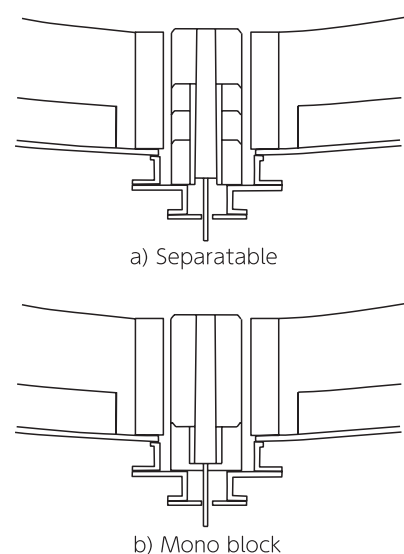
Two types of bottom blowing tuyere assemblies installed at the bottom of an EAF.
